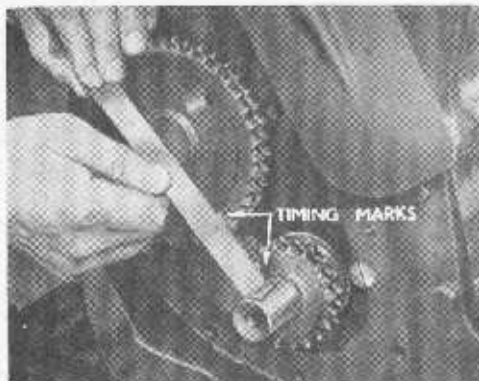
Valve timing marks. The timing marks on the crankshaft and camshaft sprockets should be lined up as shown.
